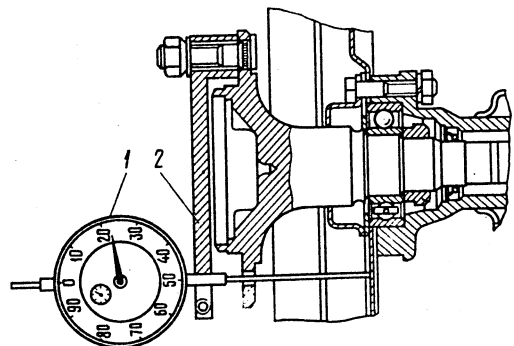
Measuring the Axle Shaft End Play with Wheel and Brake Drum Removed:
